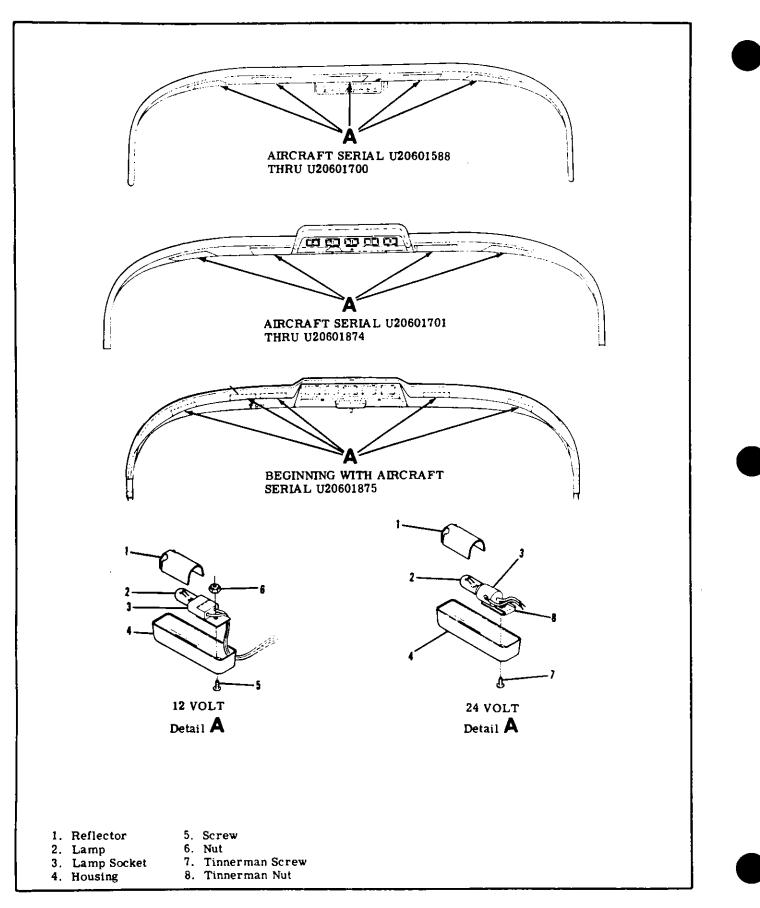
Instrument Panel Glare Shield Light Installation (Sheet 2 of 2)
